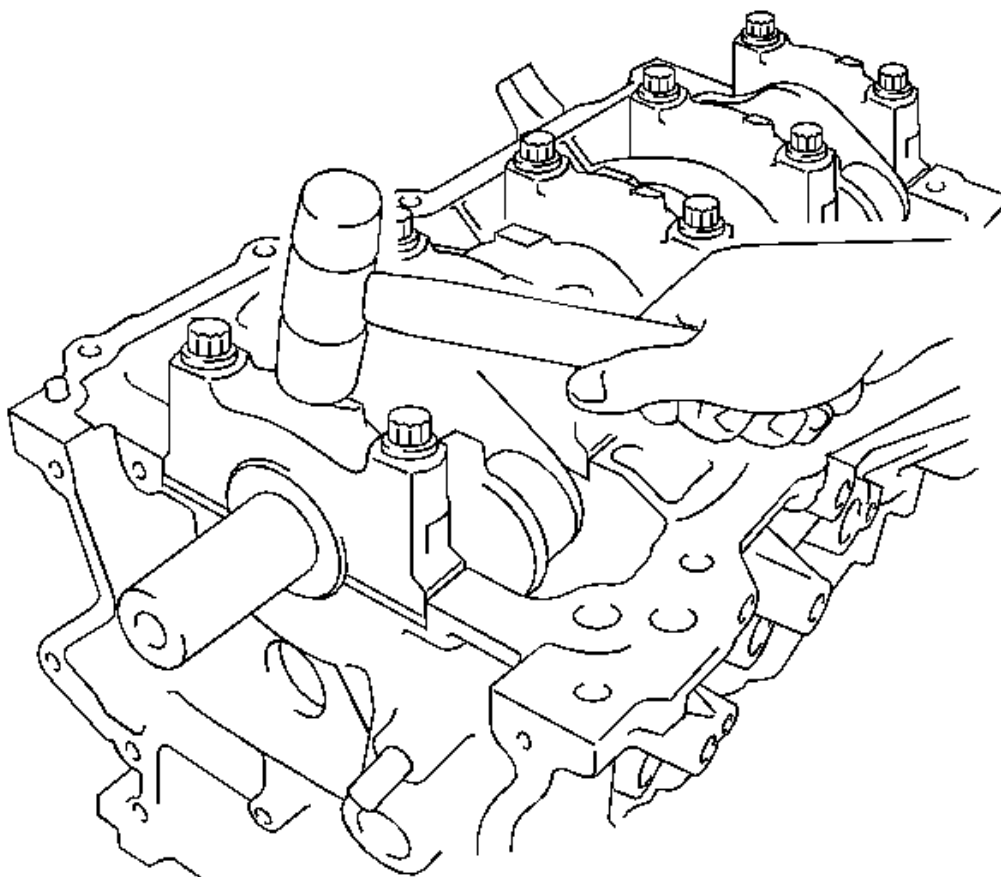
Tapping Bearing Cap To Ensure Proper Fit
